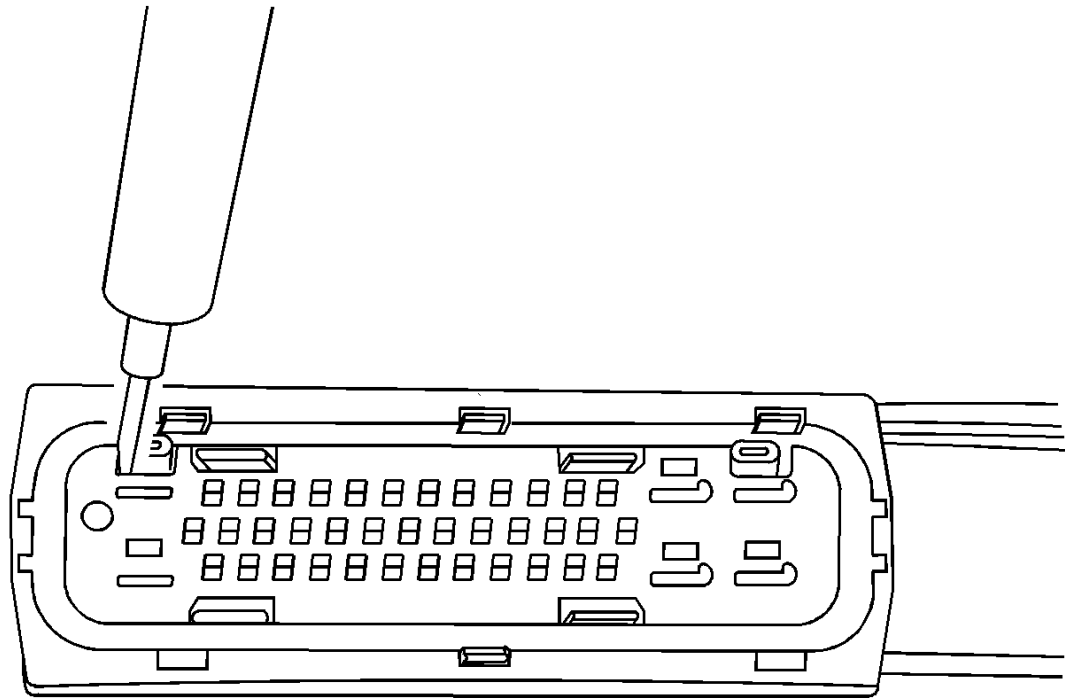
View Of Release Tool Being Used For Larger Terminals
